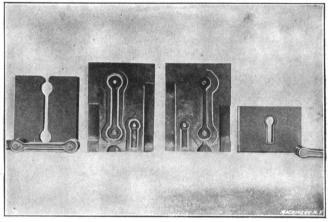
Set of Dies for Drop-forging and Trimming Shackles and Pins
